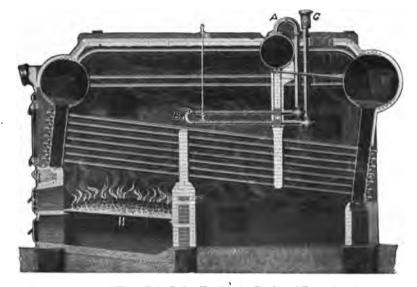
Section of Water-Tube Boiler Showing Application of Foster Superheater
